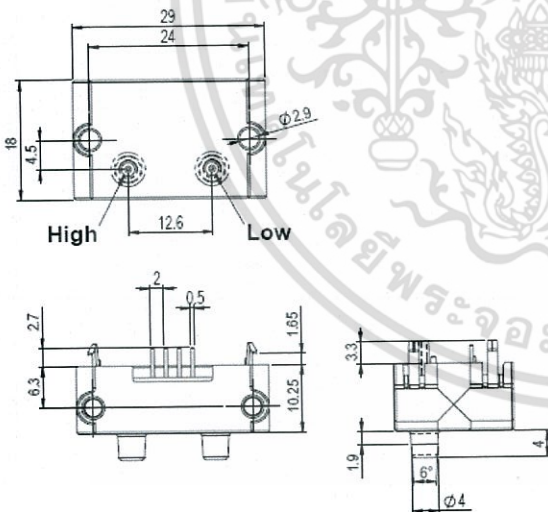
SDP60x/SDP50x manifold mount version. All dimensions are in mm.
